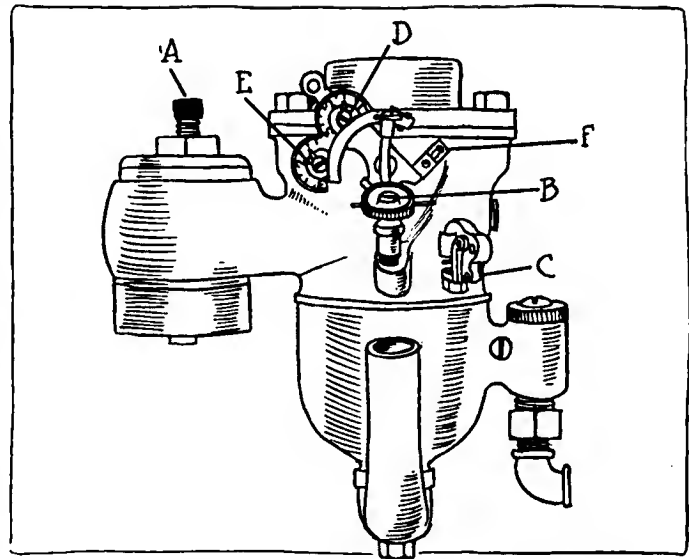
Schebler model L carbureter, showing the various points at which adjustments may be made
